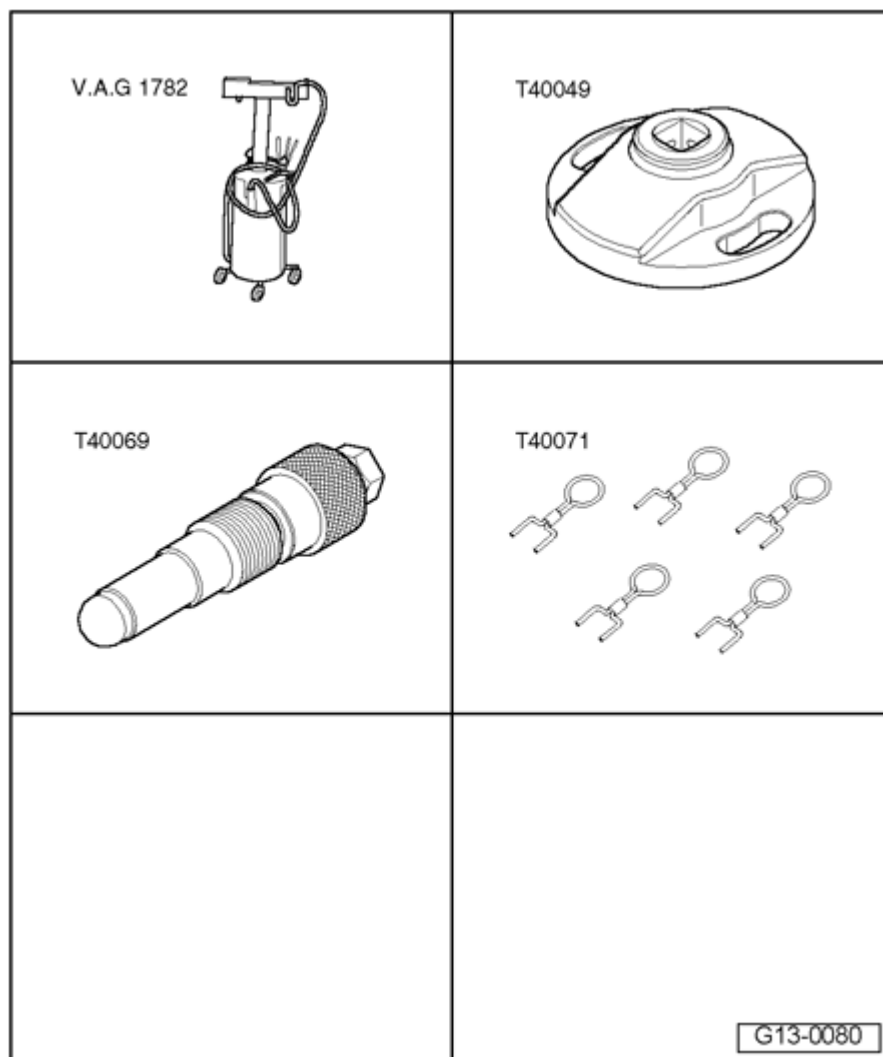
Identifying Special Tools - Power Take-Off Drive Chain, From 04.06, Removing And Installing
